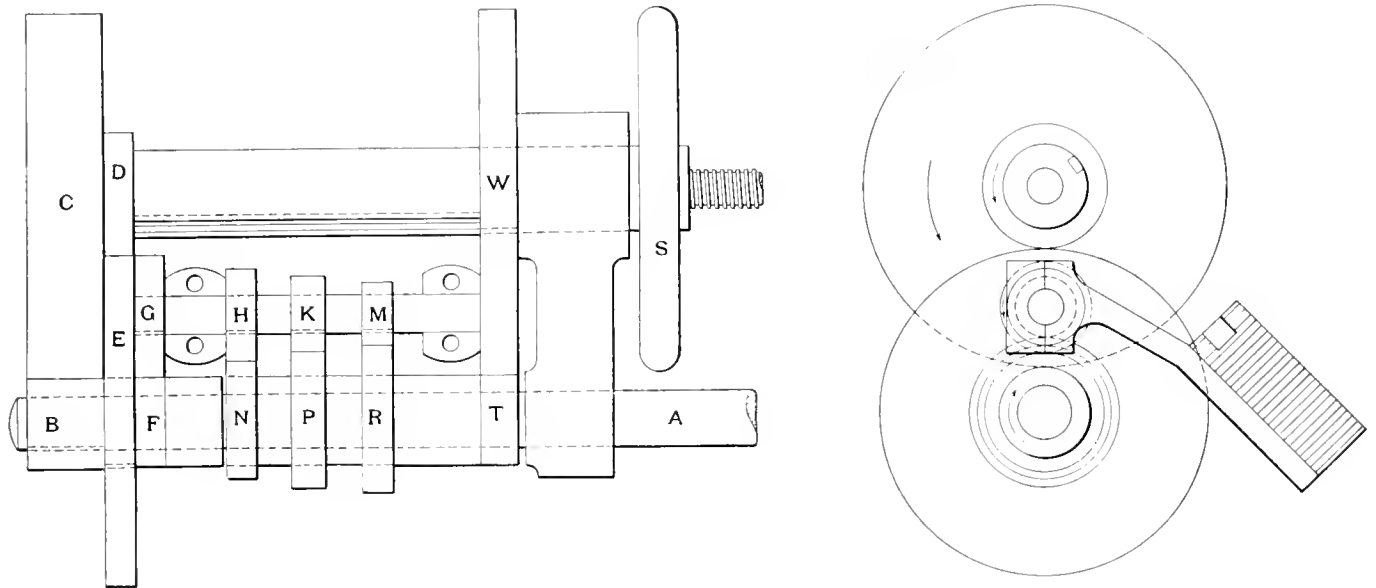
Automatic Feed Attachment for Quartering Machine.
